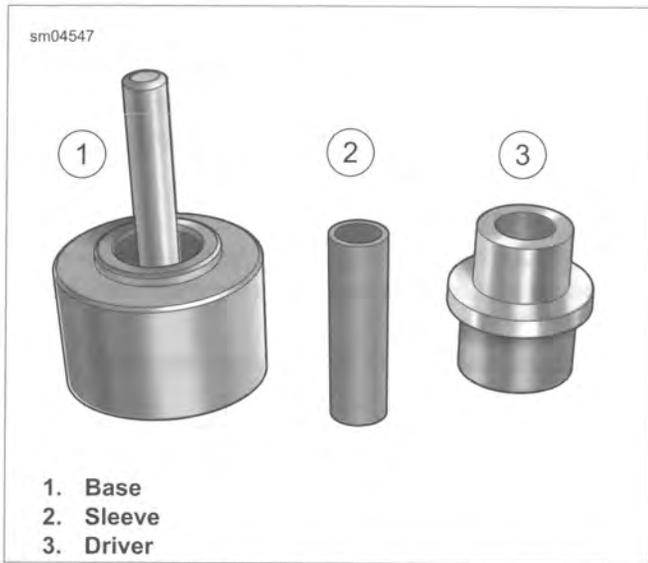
Rear Wheel Compensator Bearing Remover/Installer (HD-48921)
